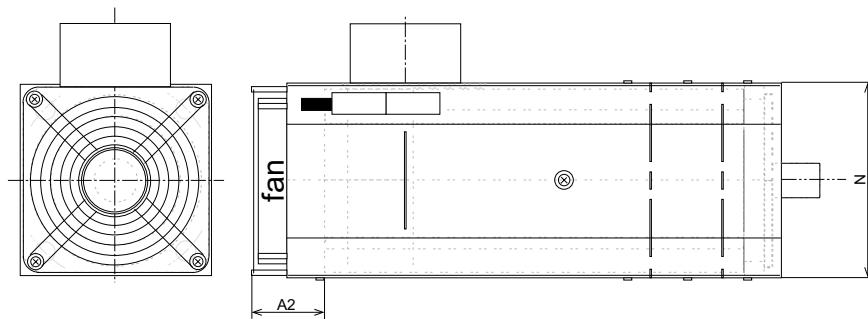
Dimensional drawing of SB Motor with surface ventilation
